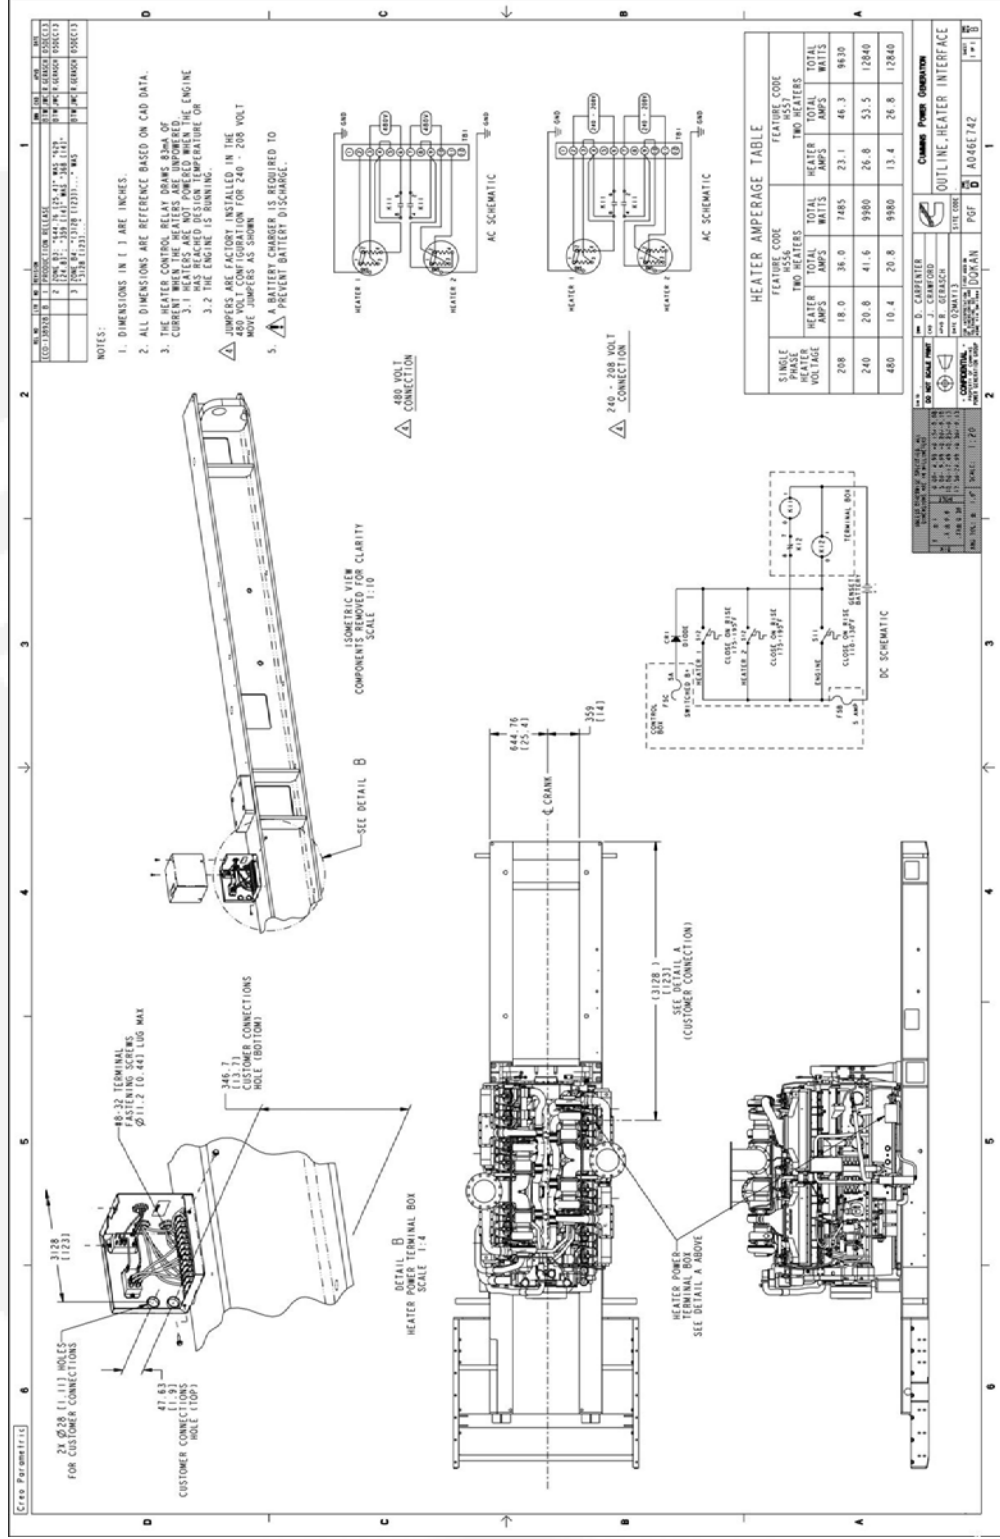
COOLANT HEATER INTERFACE OUTLINE DRAWING
